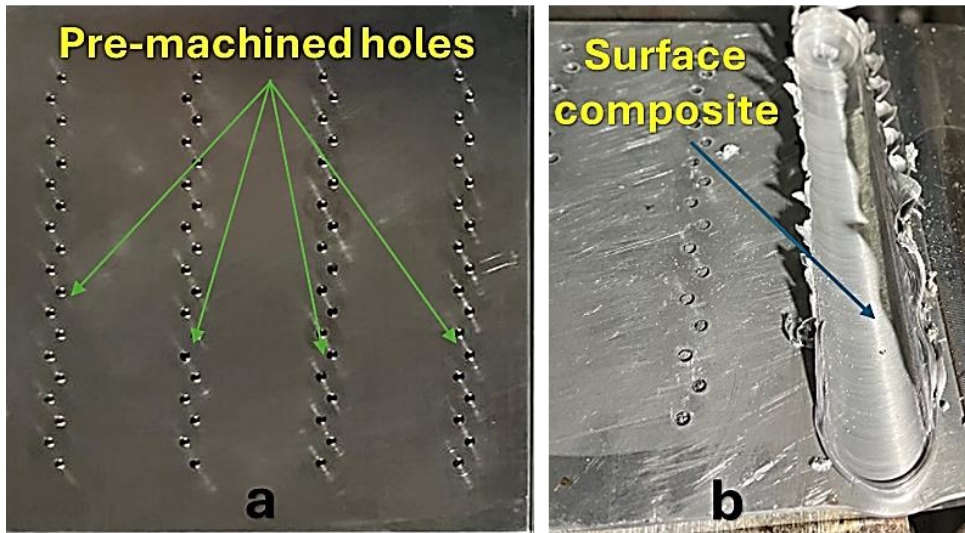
experimental setup for surface composite fabrication; (a) a metal substrate with an array of pre-machined holes, and (b) the resulting surface composite after processing.
